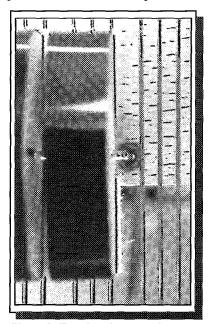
Test for clearance between guide rail and wire. Clearance is visible when wire is pushed to one side of the hole.
